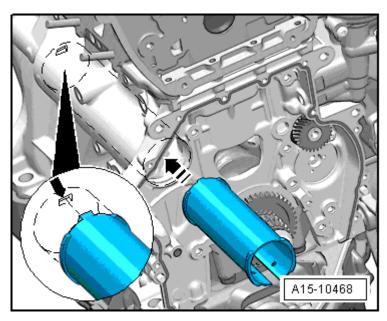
Identifying Pipe For Balance Shaft - Installation Position Courtesy of VOLKSWAGEN UNITED STATES, INC.
